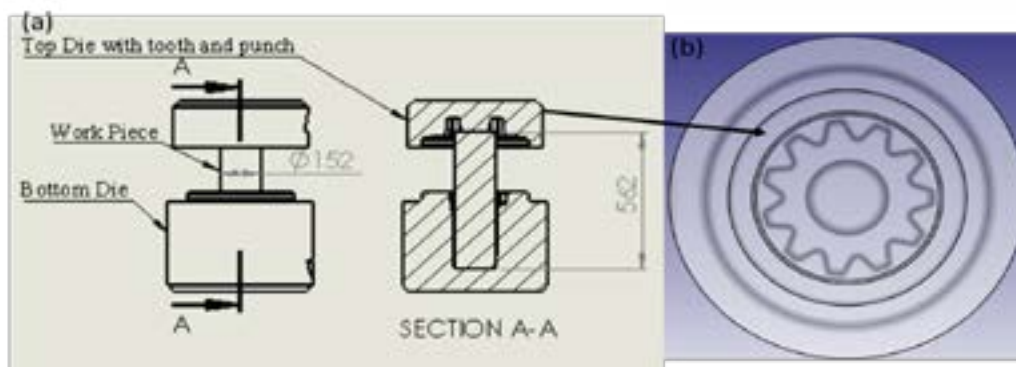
a) Schematics of near-net-shape forging, b) Top die with gear teeth and punch.
